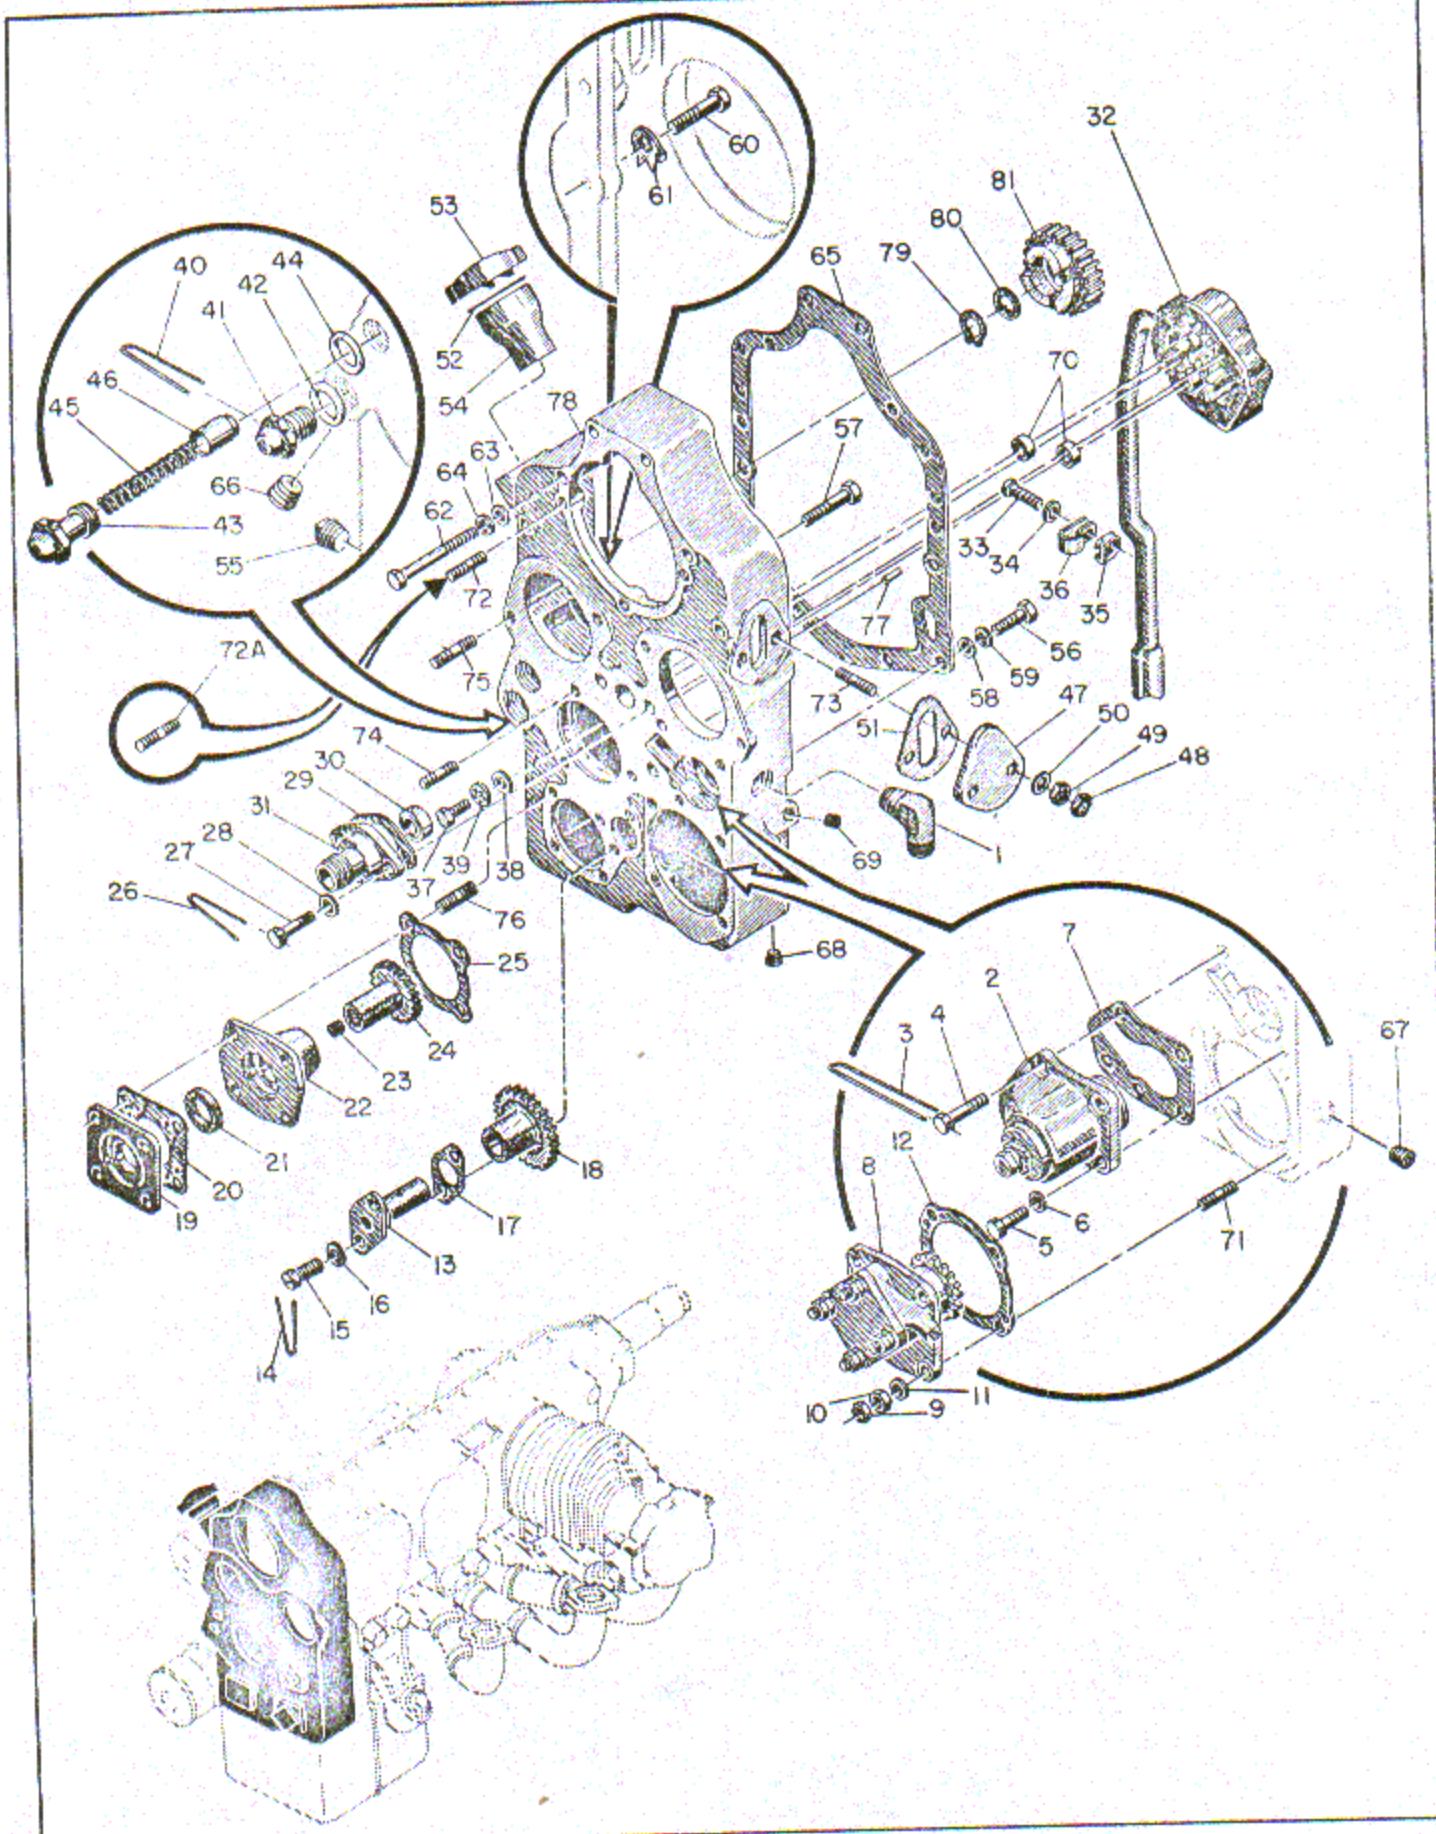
Exploded Parts View of O-470-7 Accessory Case
